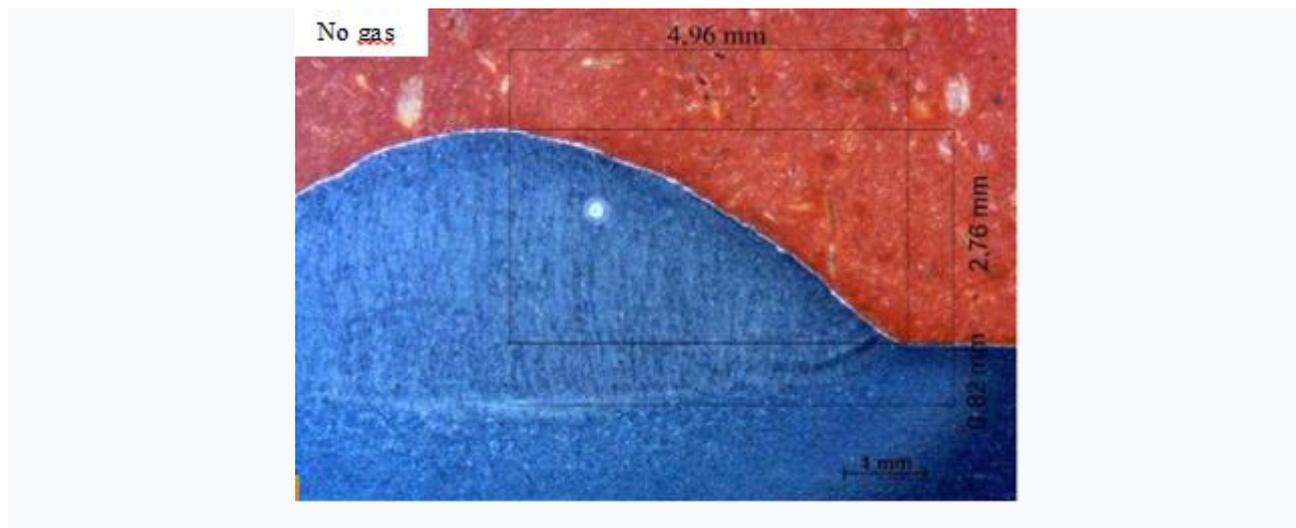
Weld bead results of MAG-CW welding without shielding gas in slave torch.
